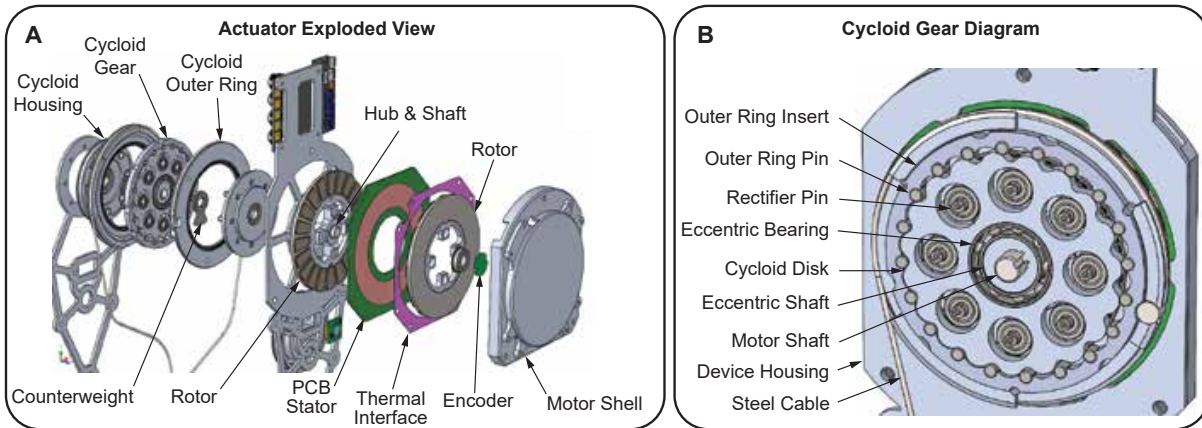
A: Exploded view of cycloid gear and axial flux actuator integrated into a wearable robot frame. The motor shaft drives the gear input torque while the outer ring rotates to transmit power. B: Diagram of major functional cycloid components.
